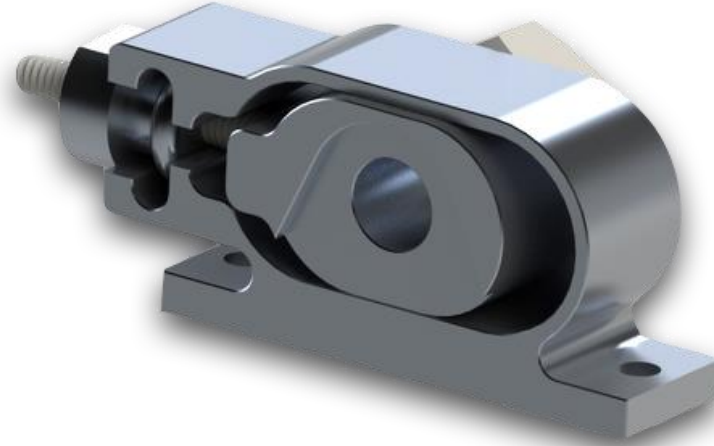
Rear dropout assembly. Consists of 4 pieces: dropout mount, dropout slide, adjustment screw, locking nut.
